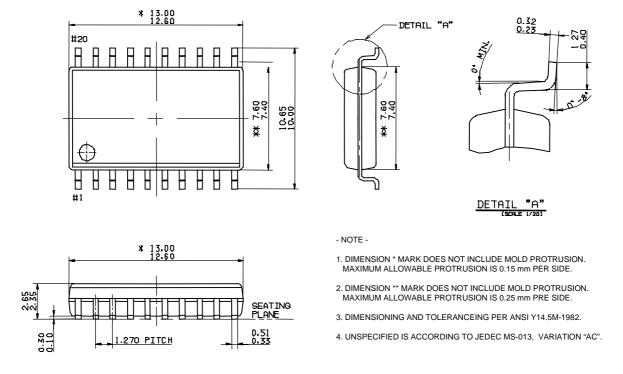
20SOP (300MIL) Pin Dimension (UNIT: mm)
